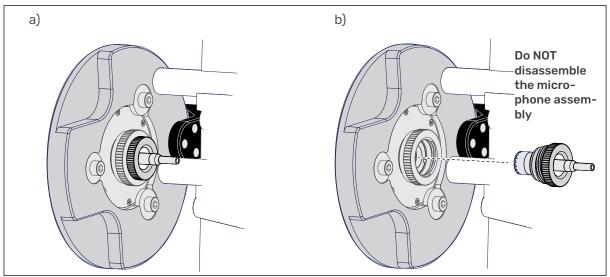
Removing a microphone assembly for calibration. When removed from the assembly (b), it is ready for calibration.
